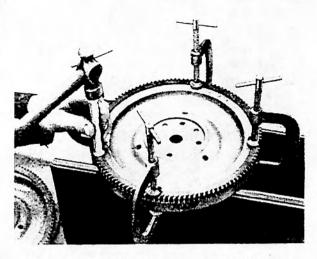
FITTING RING GEAR TO FLYWHEEL
